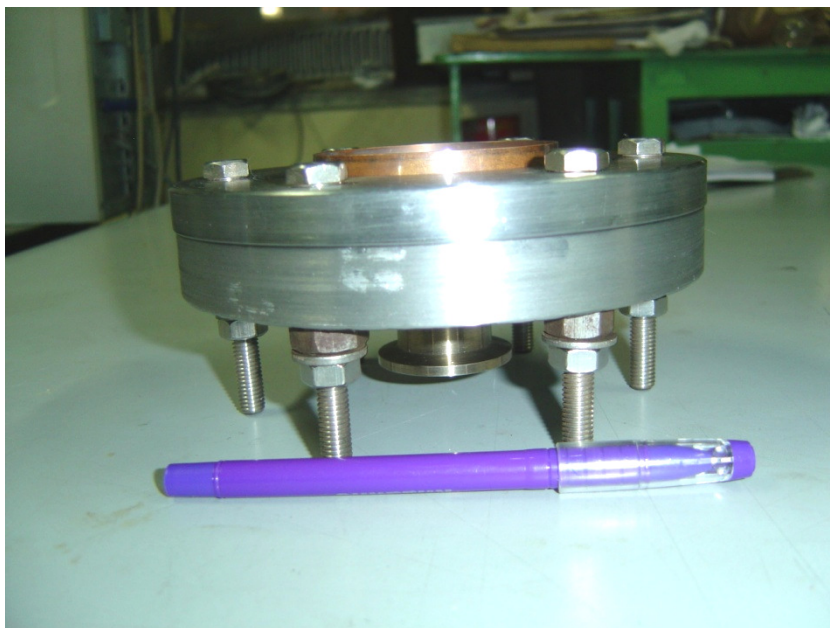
Front View of assembled fixture with test piece for helium leak detection
